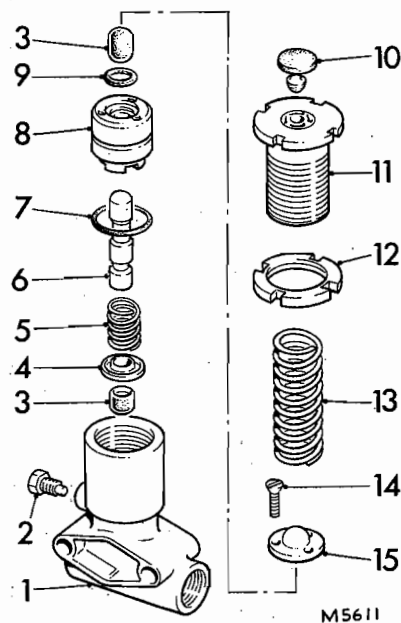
EXPLODED VIEW OF PRESSURE PROTECTION VALVE
